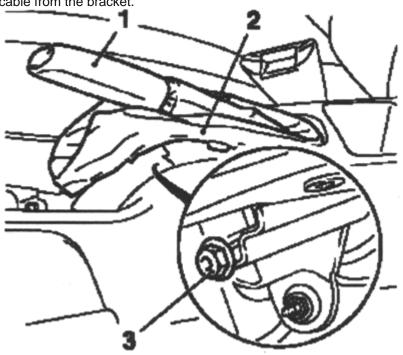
Attenuation Rope parking brake: 1 - hand brake lever, 2 - cover handbrake lever;
